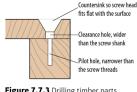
Drilling timber parts ready for a countersunk screw
